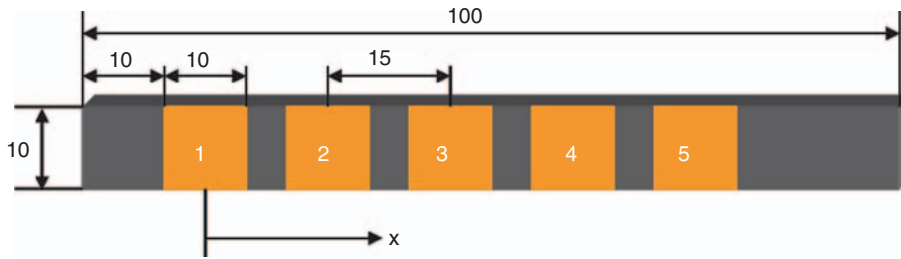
Dimensions of a coupon used for measuring contact resistance.
